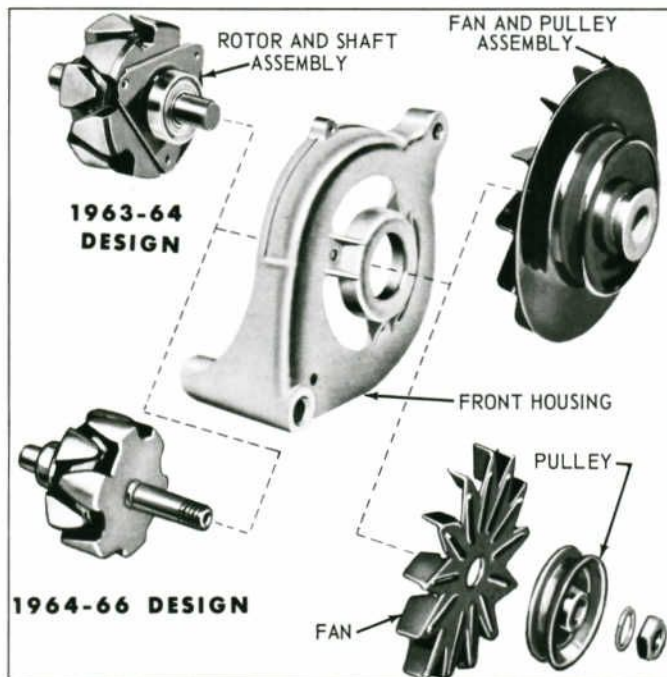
FRONT HOUSING, FAN, AND PULLEY
